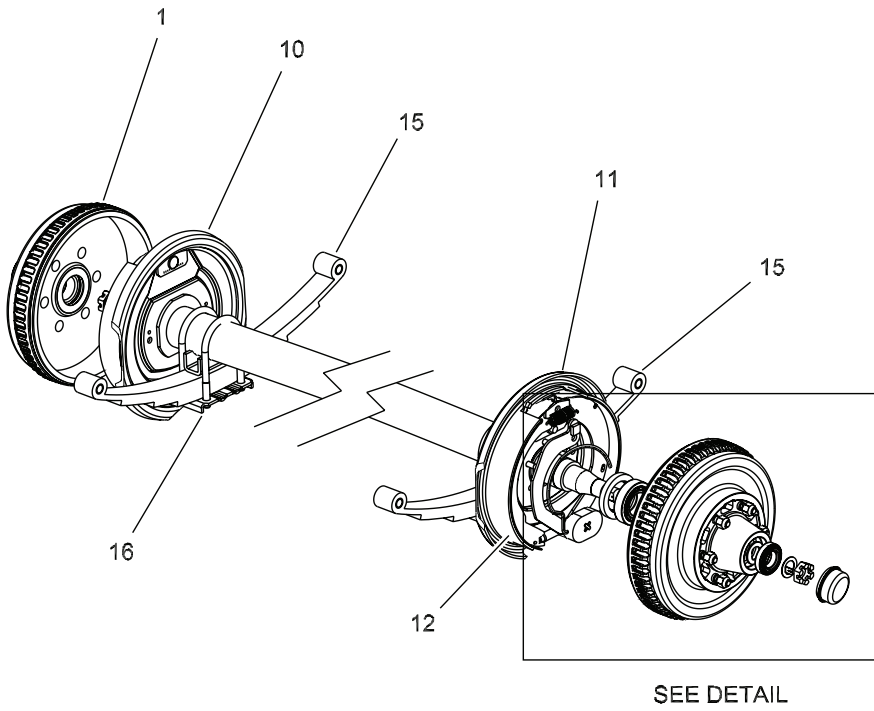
AXLE ASSEMBLY, 5200LB WITH BRAKES
